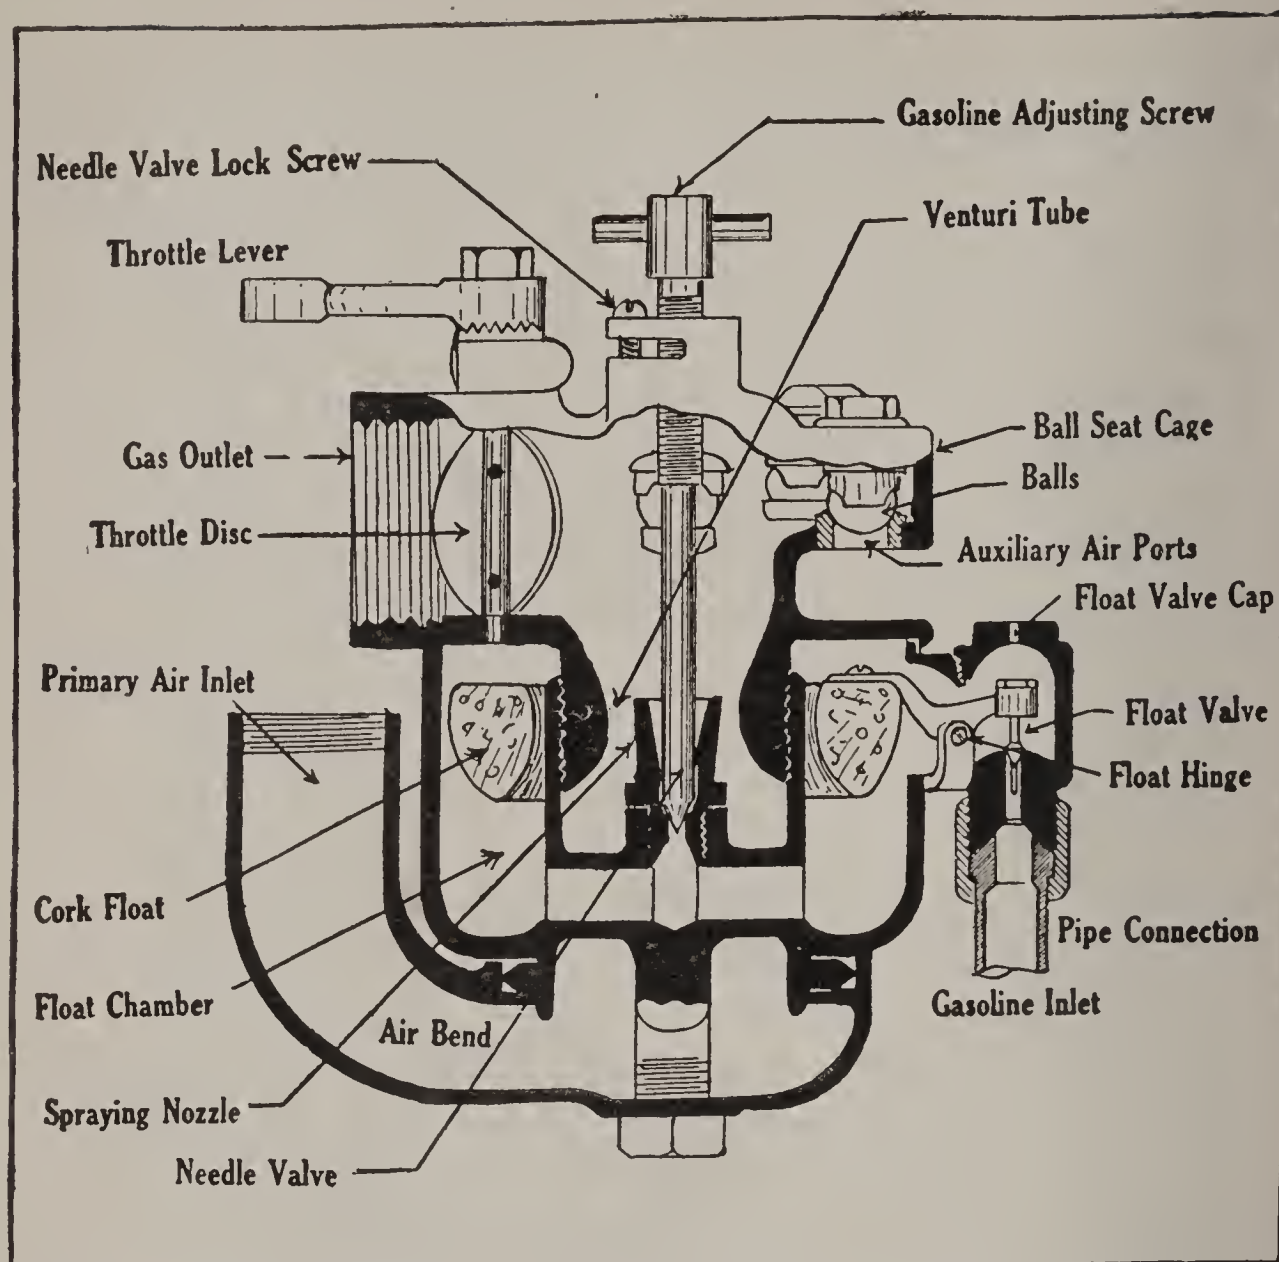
The Kingston Automatic Carburetor With Auxiliary Air Control by Ball Valves.
